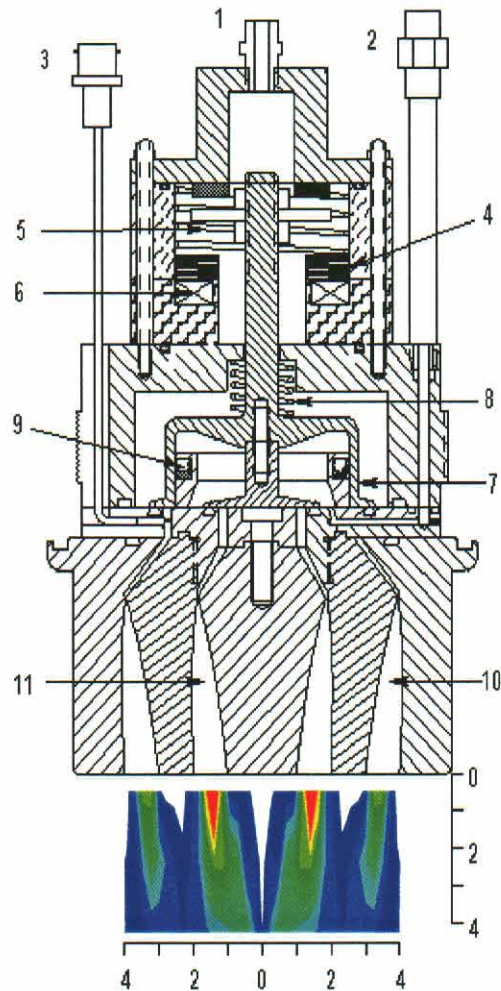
Schematic diagram of the shell-on-shell valve/nozzle, illustrating the inner structures and dimensions: 1) outer plenum gas inlet, 2) inner plenum gas inlet, 3) break-down pin output, 4) hammer, 5) hammer reset spring, 6) solenoid, 7) poppet, 8) poppet reset spring, 9) sliding seal, 10) outer nozzle, and 11) inner nozzle. The gas density contours are shown under the nozzle sketch. Scales are in cm.
